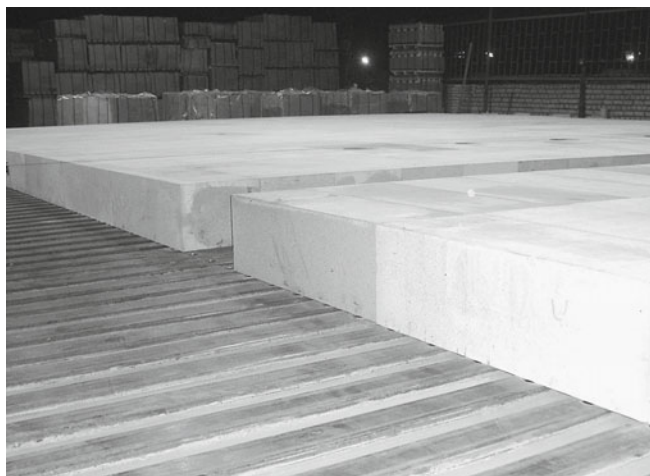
Assembly bench and furnace bottom for Kamyshin Glass Works.
